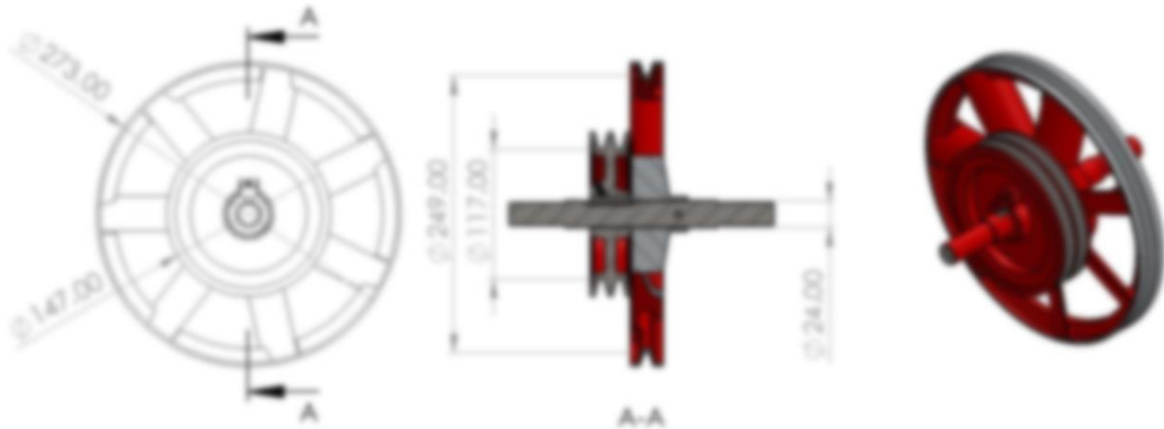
Mechanical Design and Dimensions of The Speed Reducer
